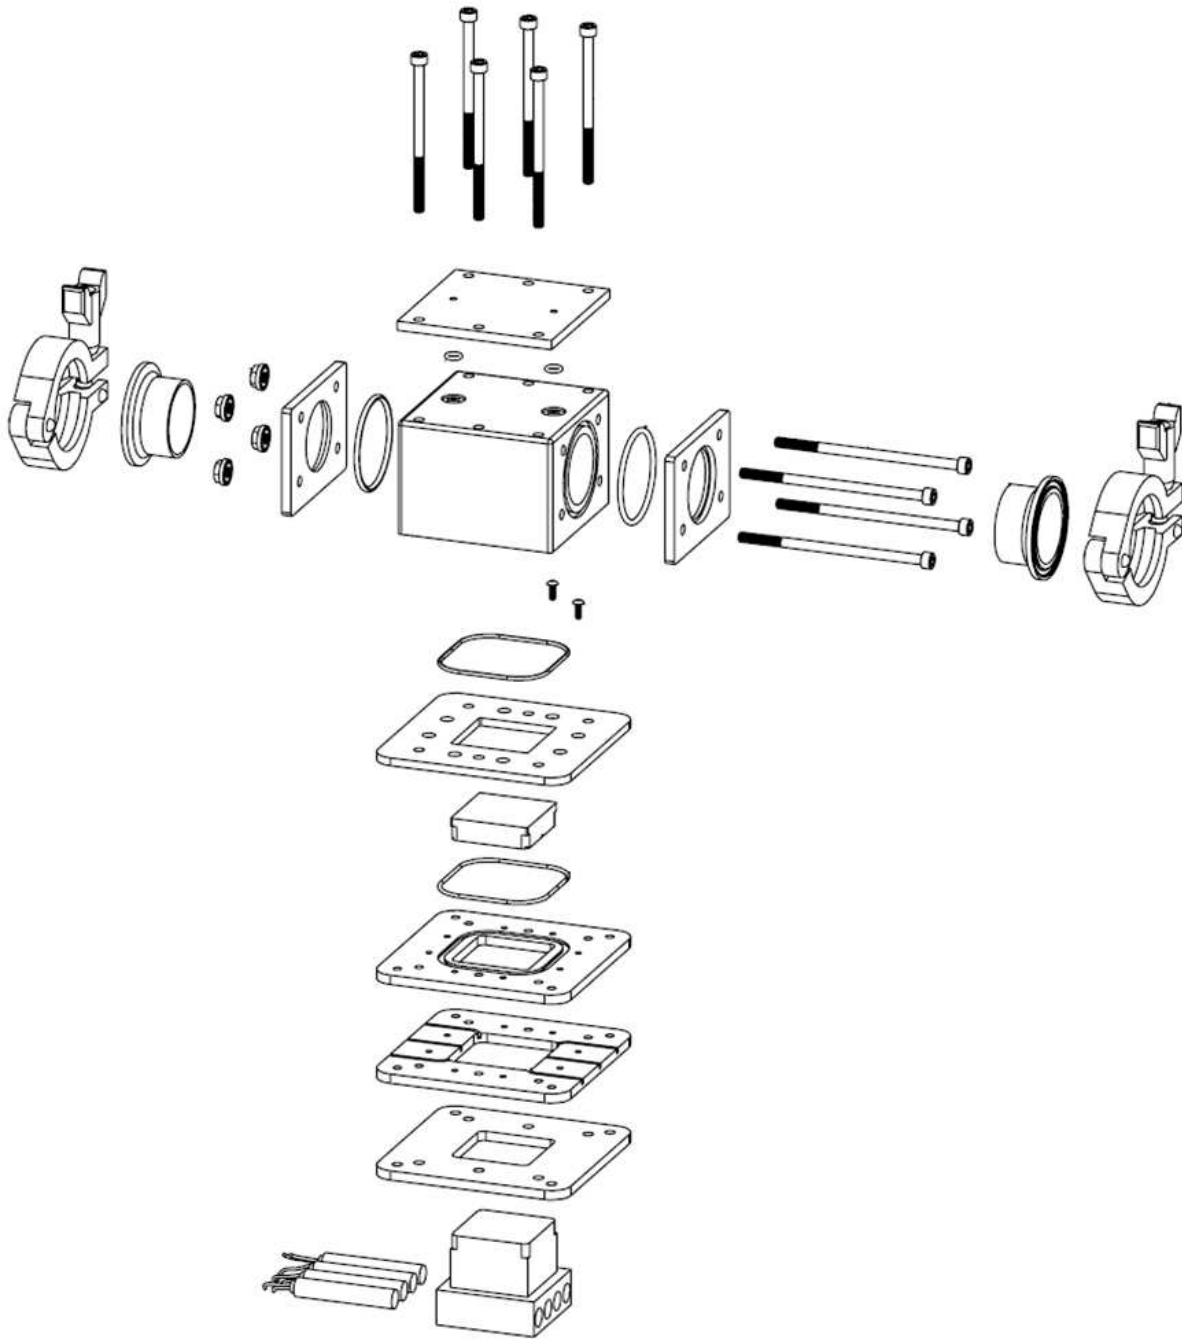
Exploded view of Gen II surrogate heater and impingement device assemblies
